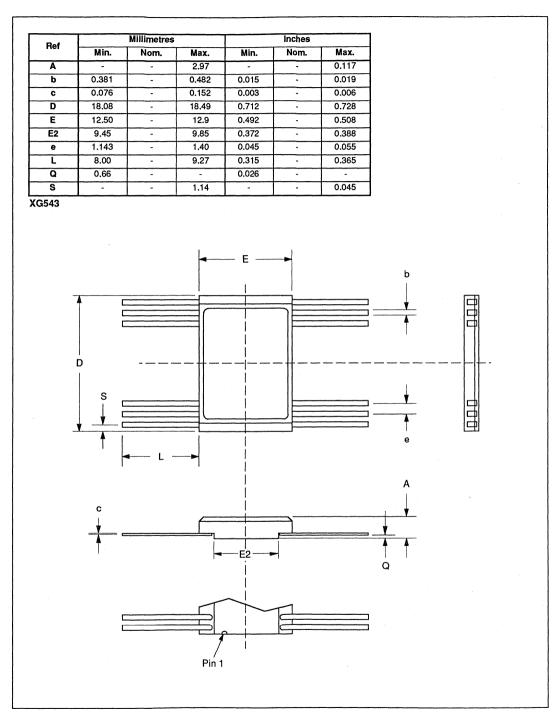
28-Lead Dual Flatpack (Solder Seal) - Package Style C
